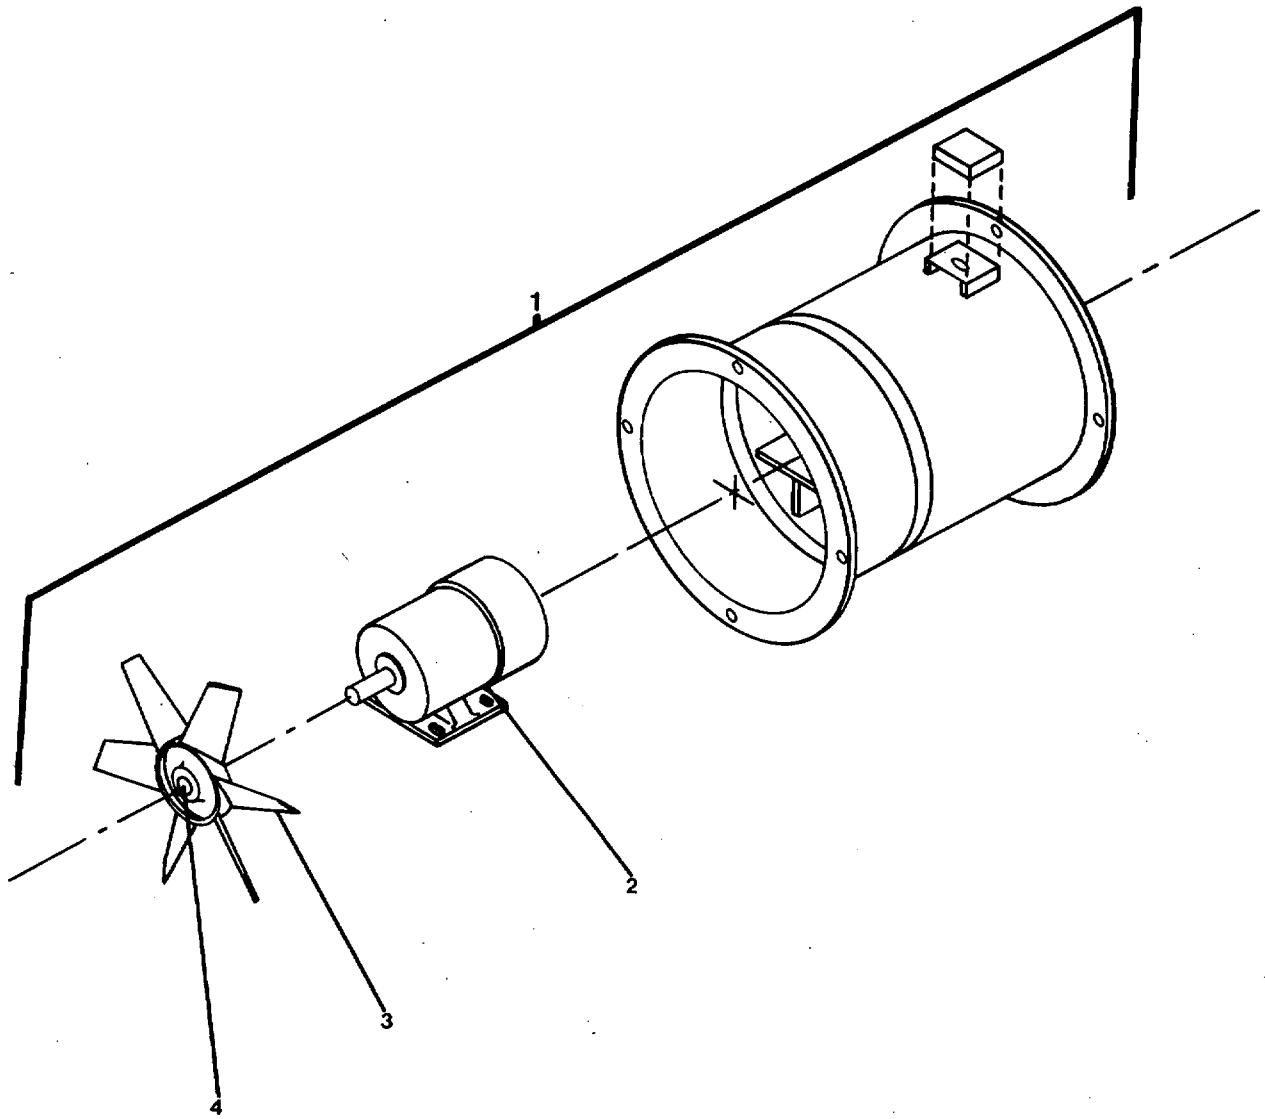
Ventilating Fan (Exhaust Fan #3).
